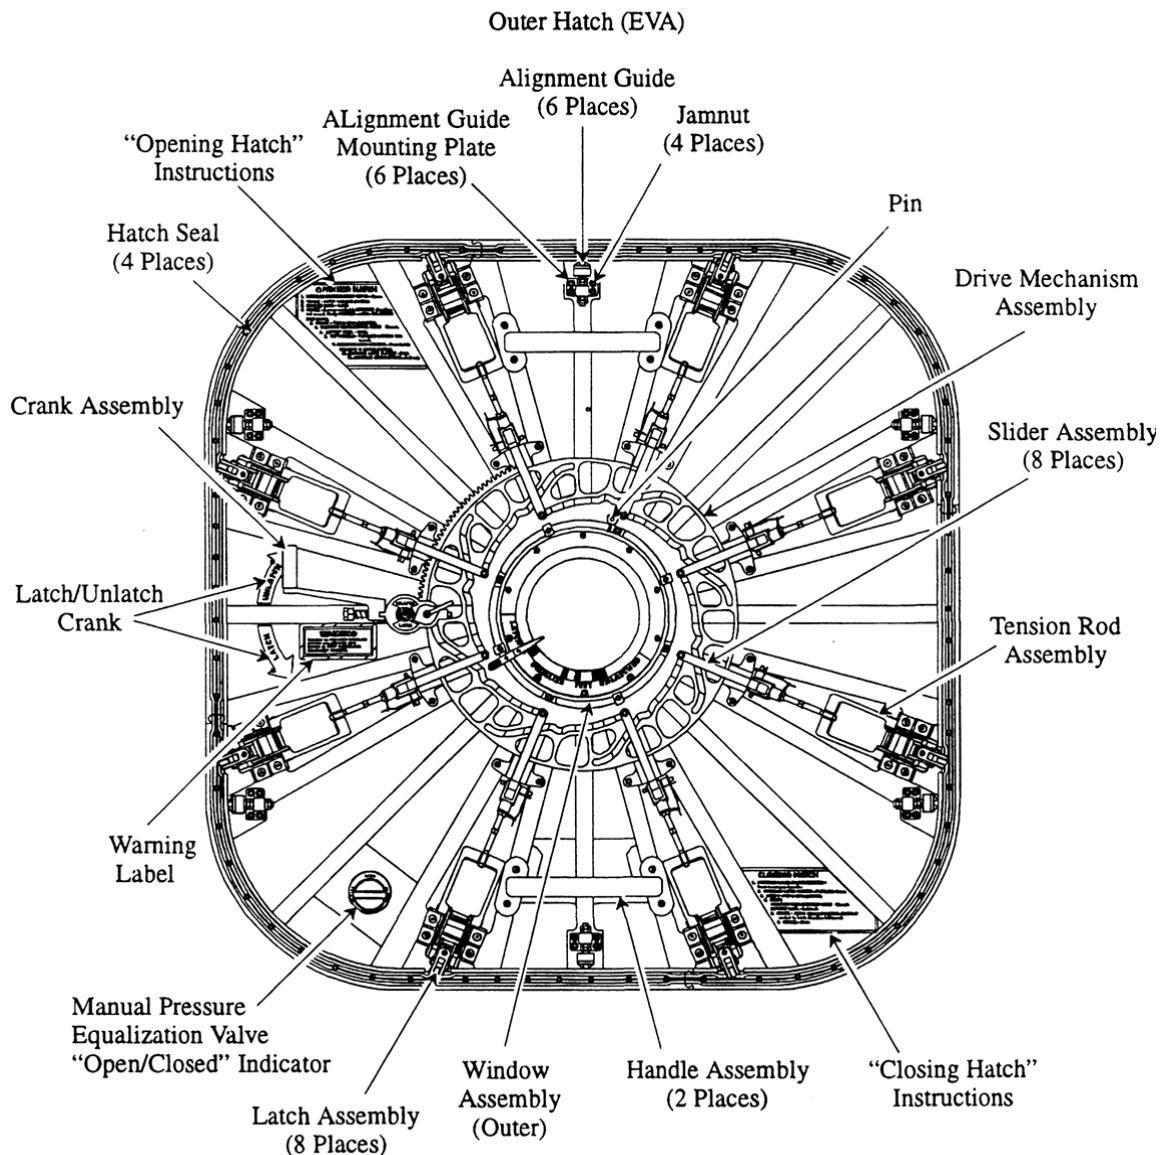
Outer hatch EVA technical drawing of the ISS hatch [14].
